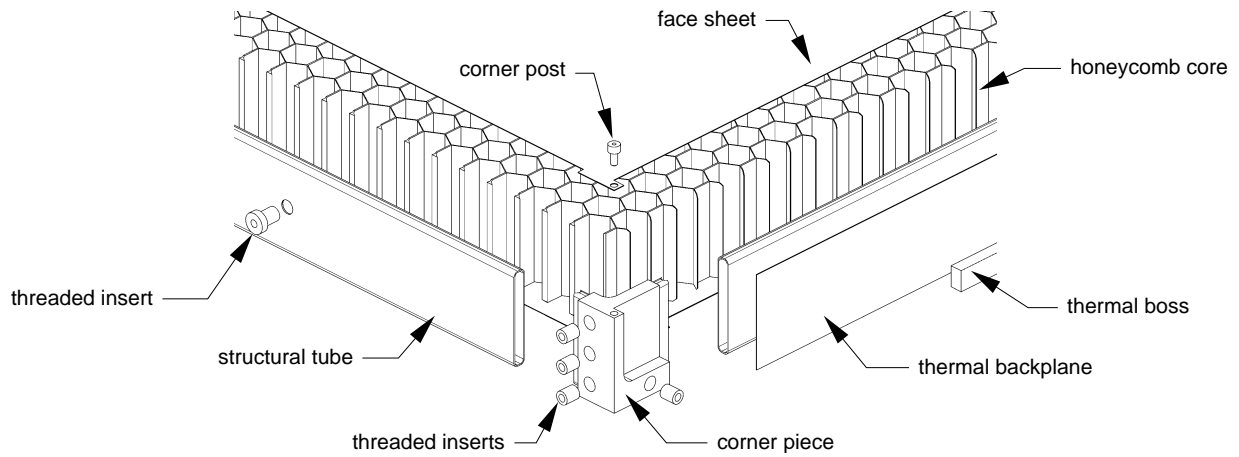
Exploded view of Concept 2 composite tray assembly, close-up on corner details.
